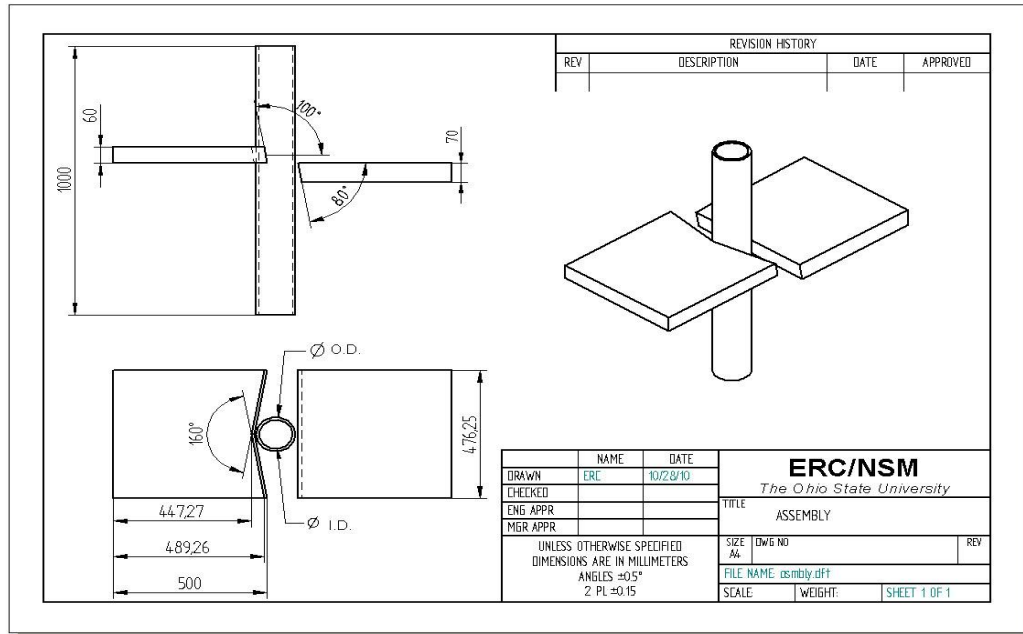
Tool (Shear Ram) and Drill Pipe Geometries
